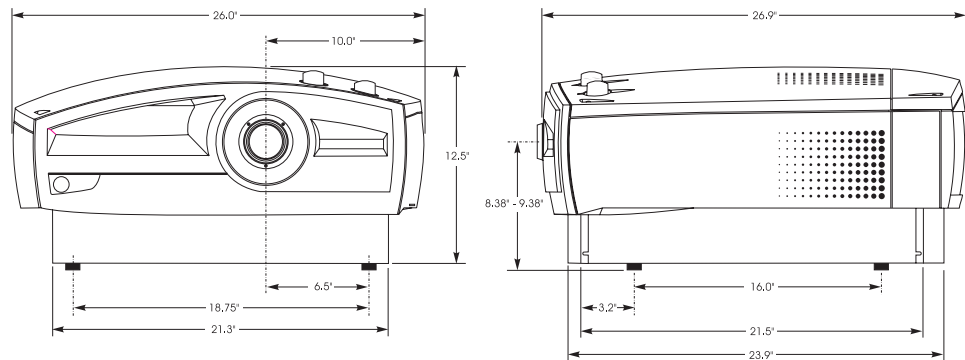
DLV 1280 Dimensions (N. American DLV 1280)
